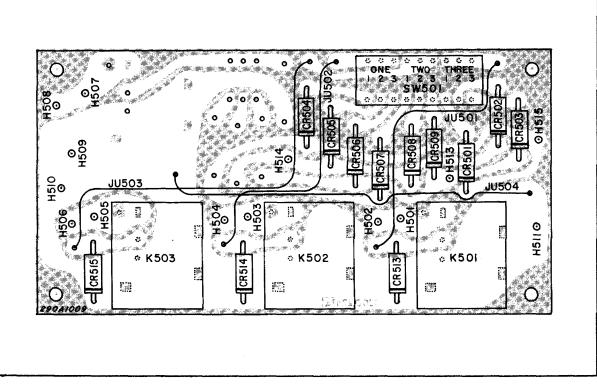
Control Module Relay Circuit Board Parts Location Diagram
